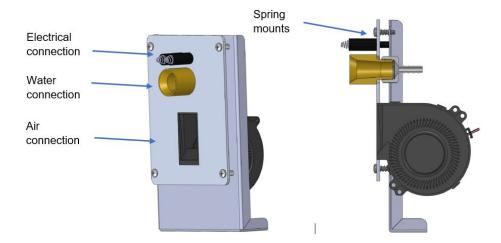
Angled view of one side of the quick-connect mechanism (left); Side view of quick-connect with spring mounts (right)
